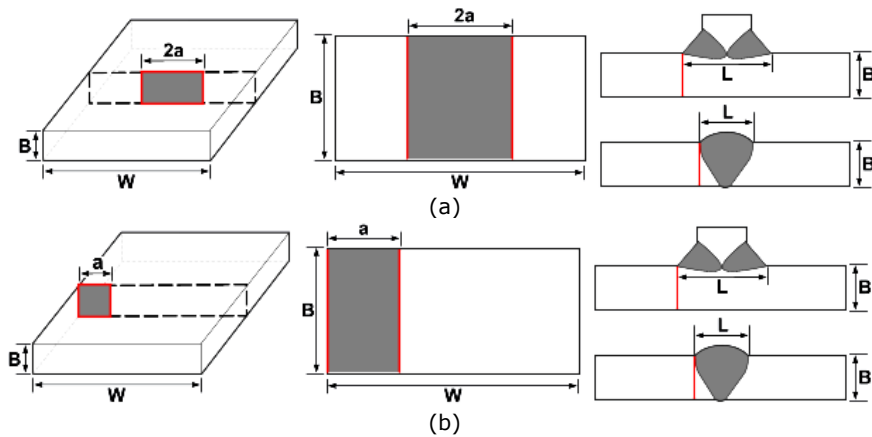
Idealizing of flaws for a flat plate – (a) through-thickness flaw
